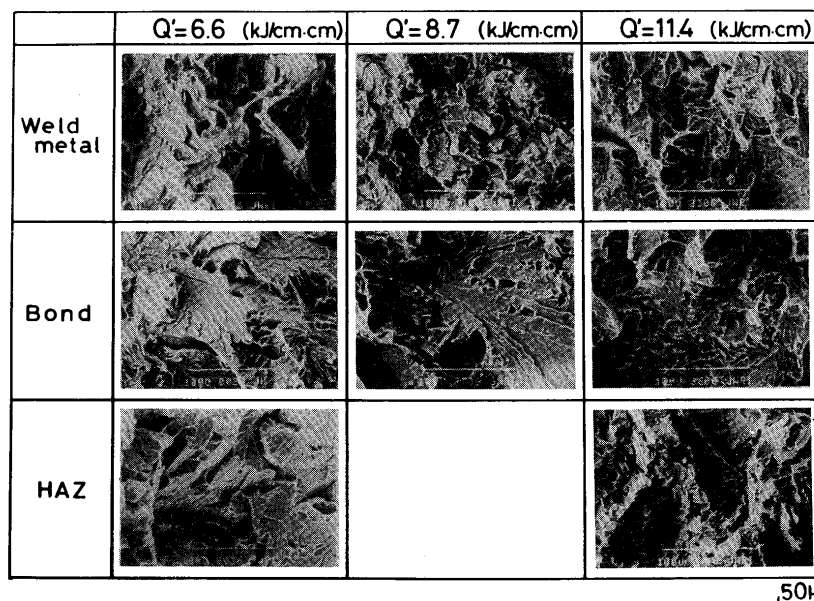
Fractographs of Charpy impact test specimens under various heat input Q' .
